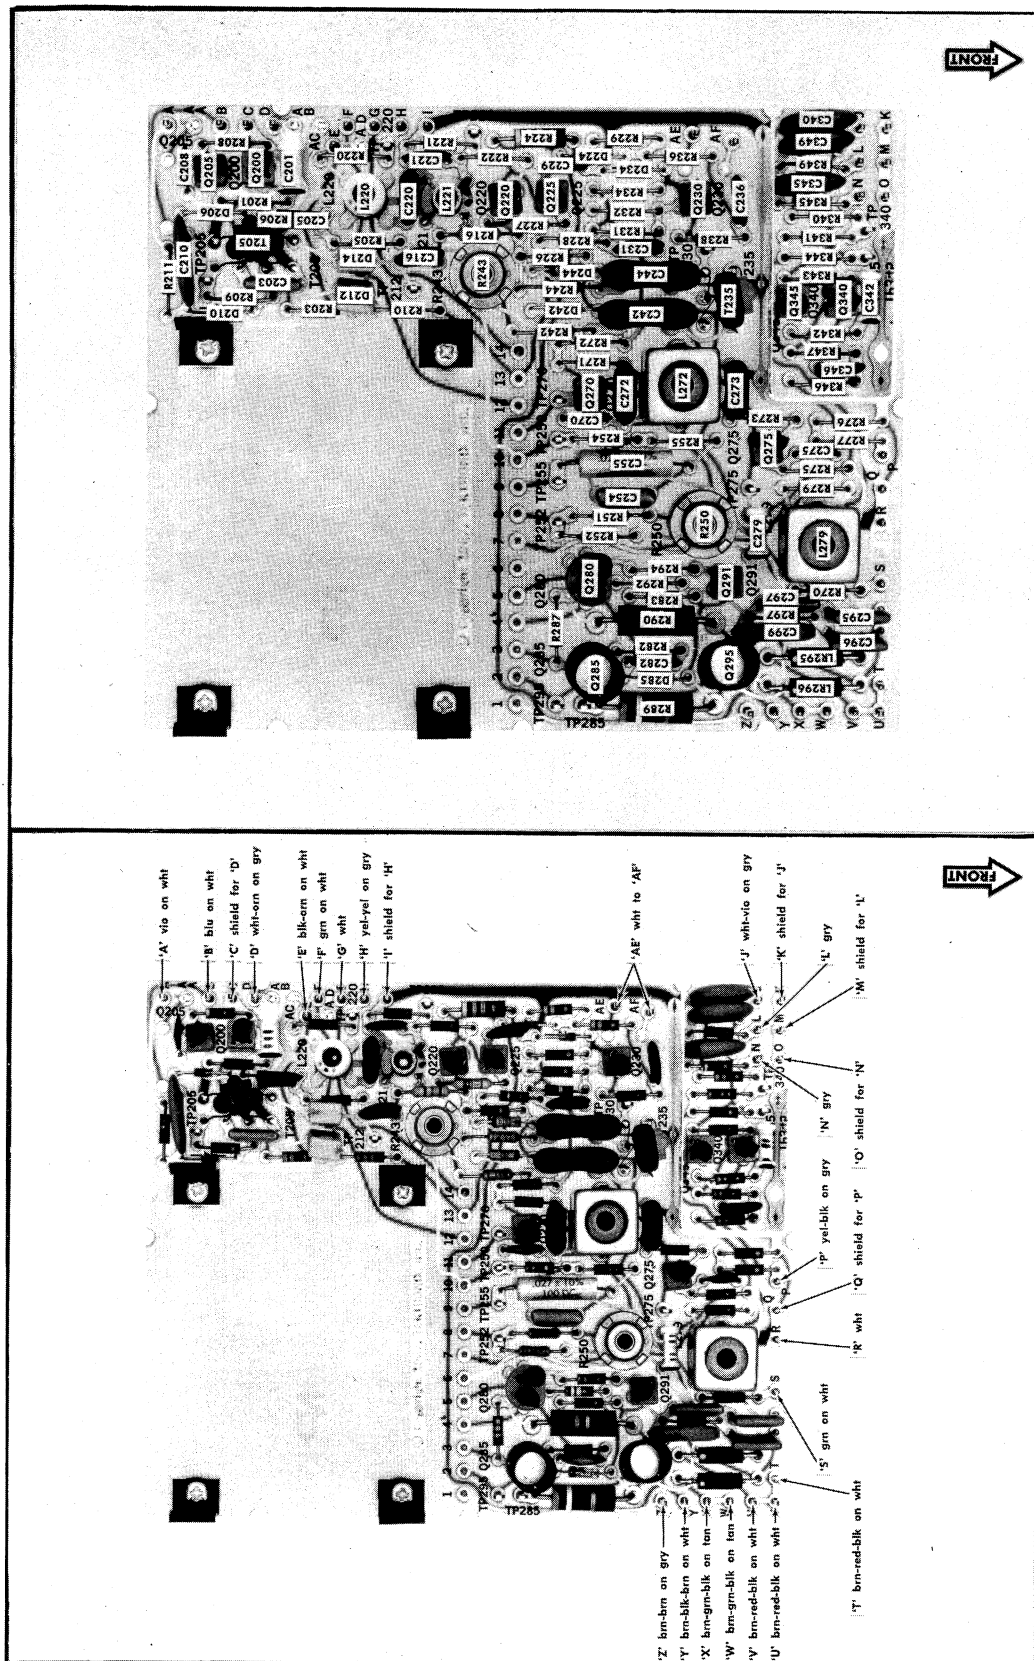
B. SCR board; component identification and wire color code for instruments below SN B150100.
